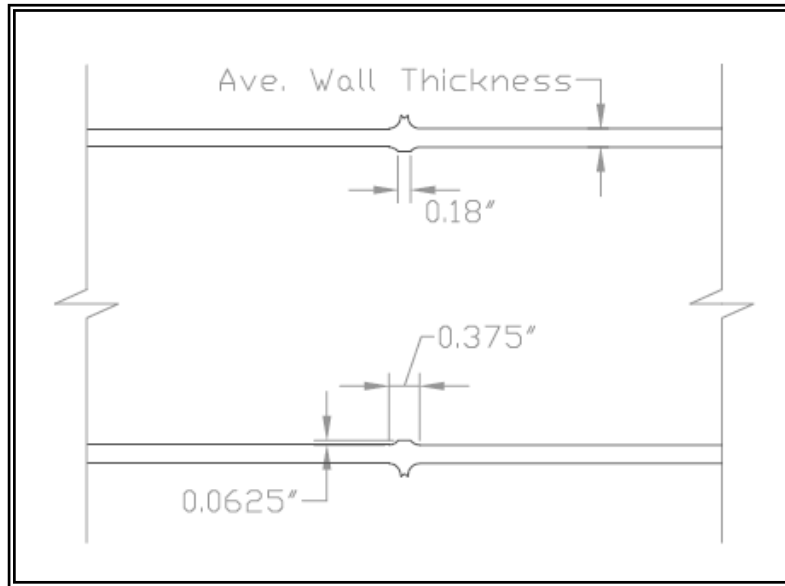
Typical 8” DR 25 C900 (DIPS) Assembled Fusible PVC™ Fusion Joint with the Bead Removed
